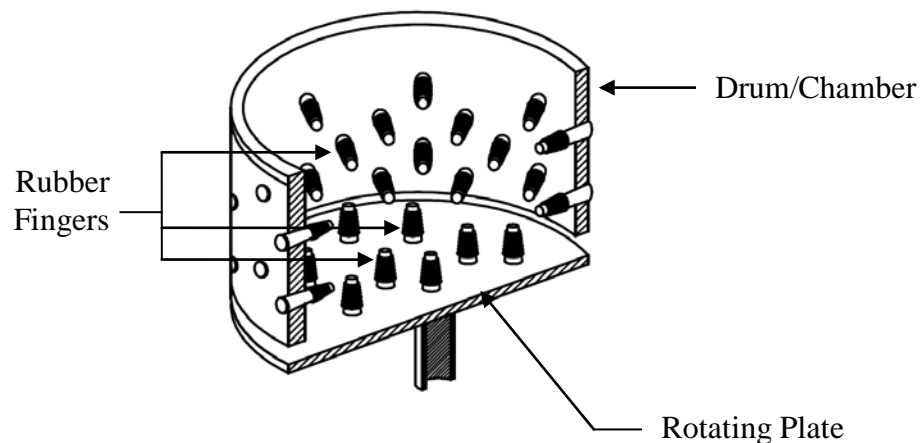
Defeathering mechanism mounted perpendicular to the shaft
